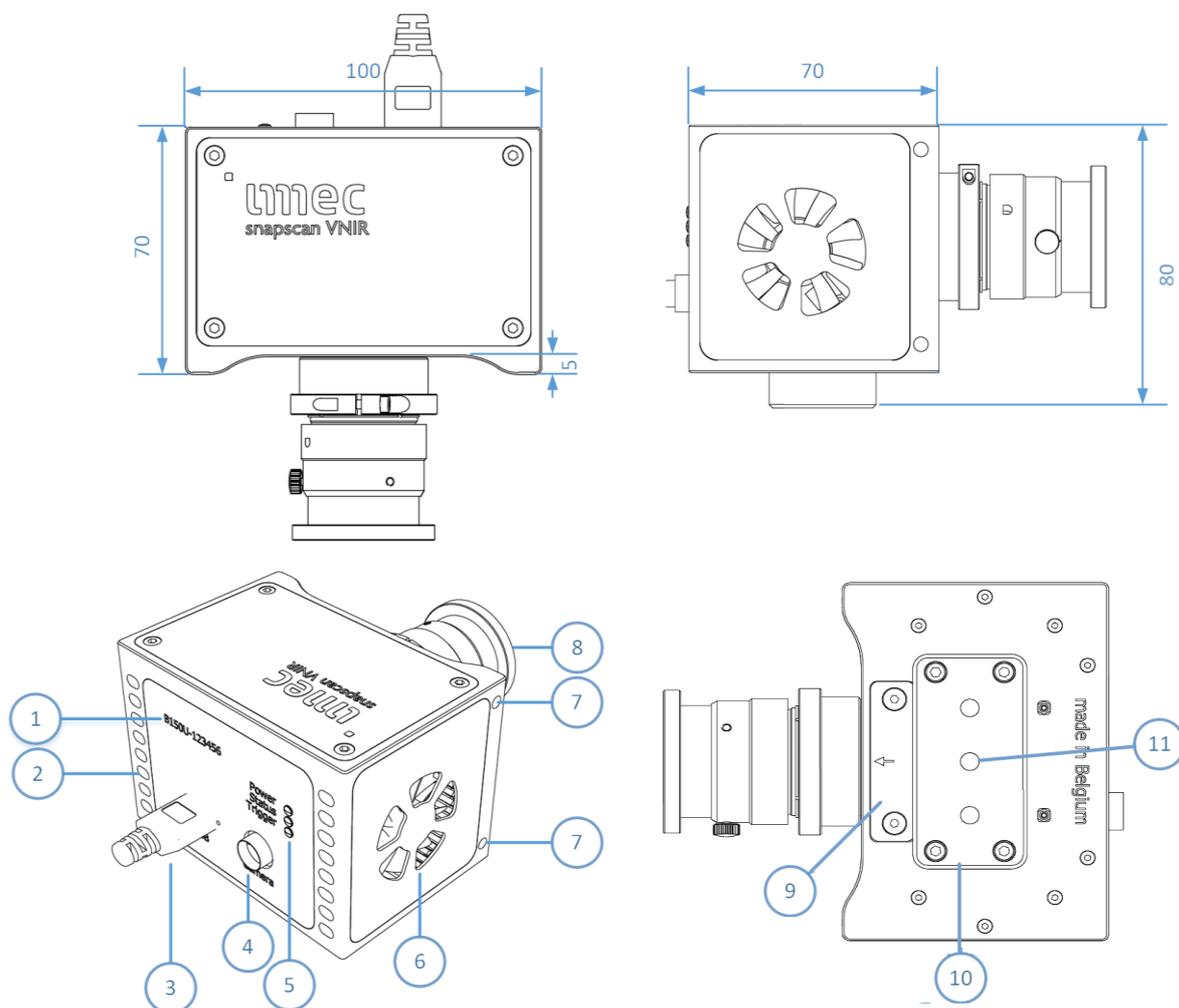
External dimensions of the camera body (all dimensions are in millimeter)
